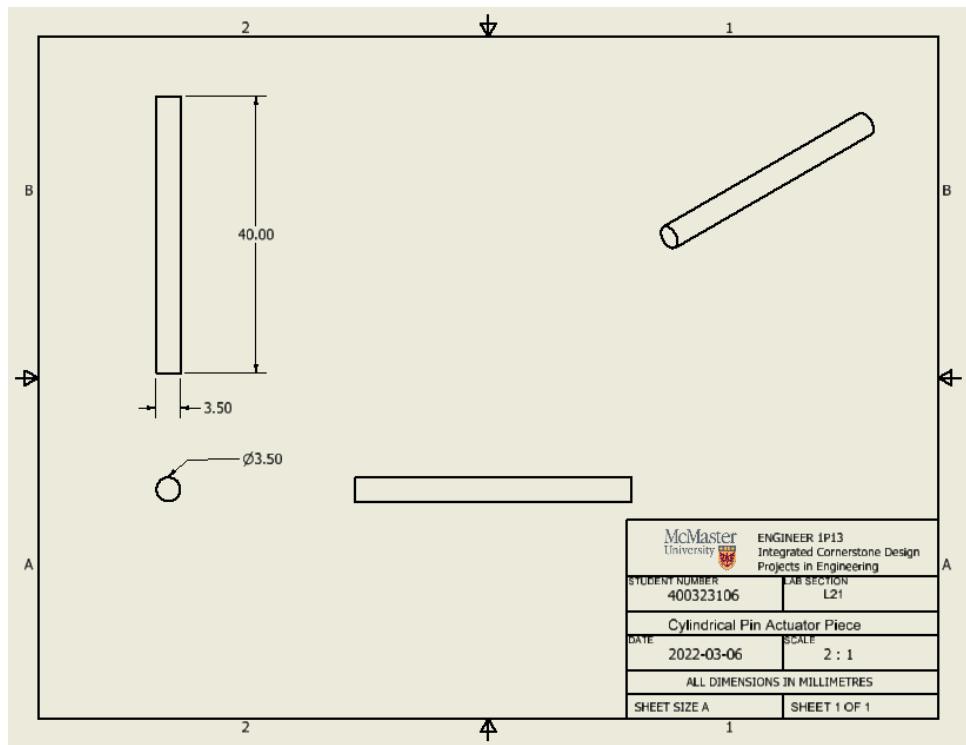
Engineering Drawing of the Cylindrical Pin Actuator Piece
